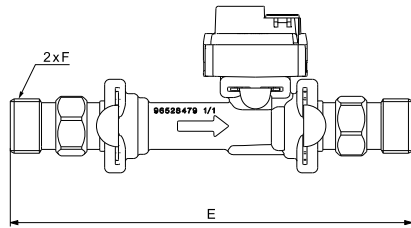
Dimensions, VFS, 1-20 l/min, with adapters
